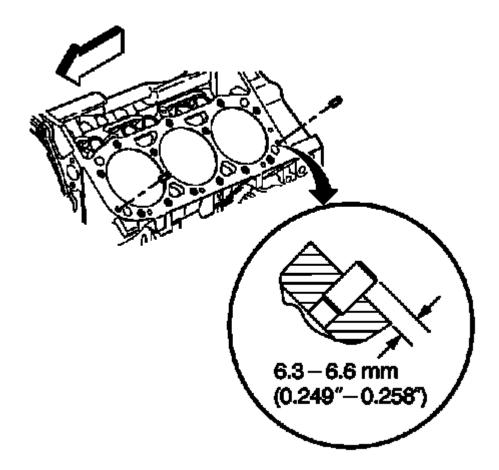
View Of Cylinder Head Locator Pins Courtesy of GENERAL MOTORS CORP.
